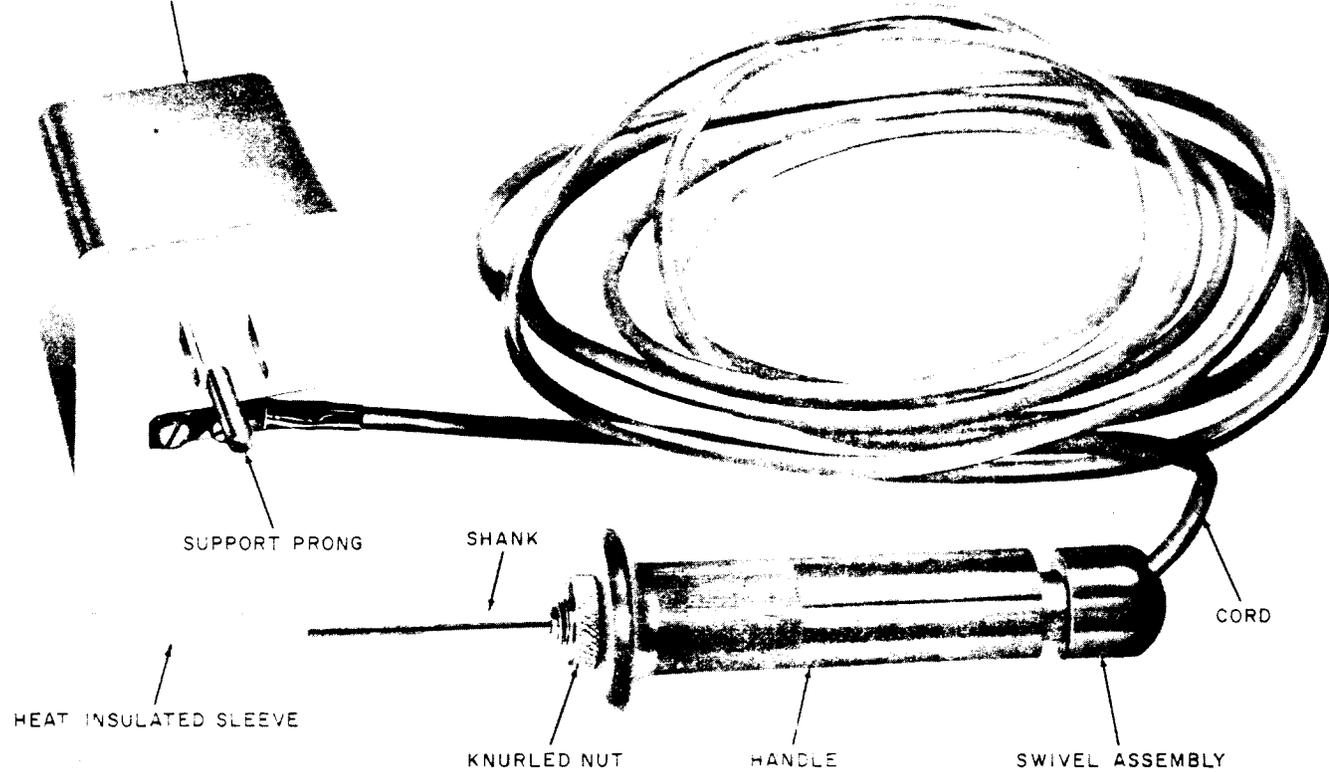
KS-16450, L1, Wire-Unwrapping Tool—Heated
